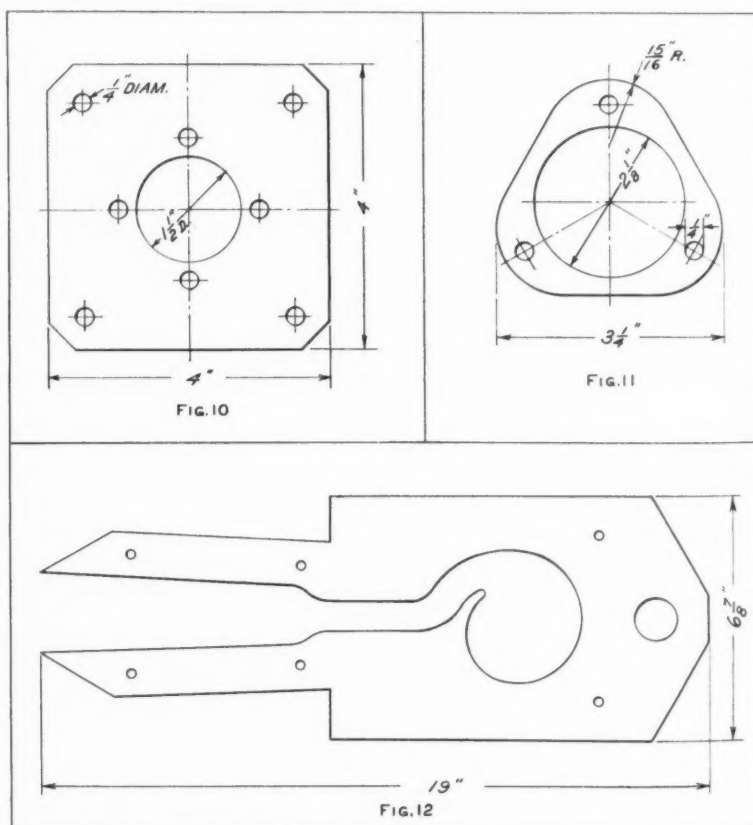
Cork Gasket Blanked and Pierced with Steel-rule Die. Fig. 11. Typical Vellamoid Gasket Produced by Steel-rule Die. Fig. 12. Blank Cut from Fish Paper with Steel-rule Die
